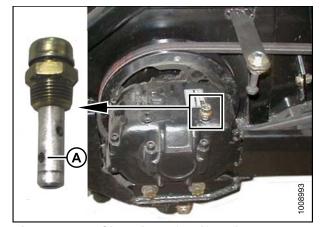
Side View of Knife Drive Box and Close-up of Dipstick
